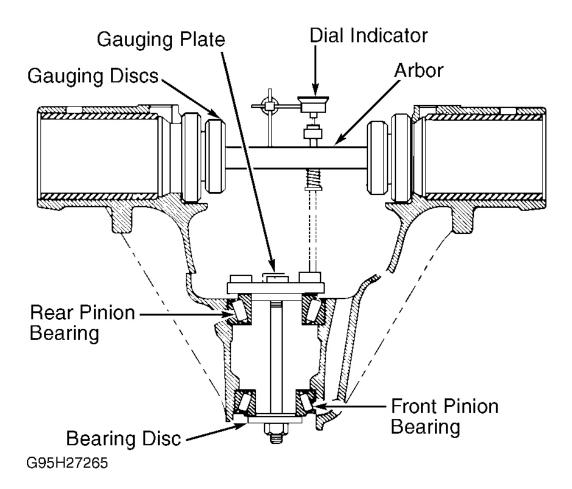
Cross-Sectional View Of Pinion Setting Gauge Set Courtesy of GENERAL MOTORS CORP.
